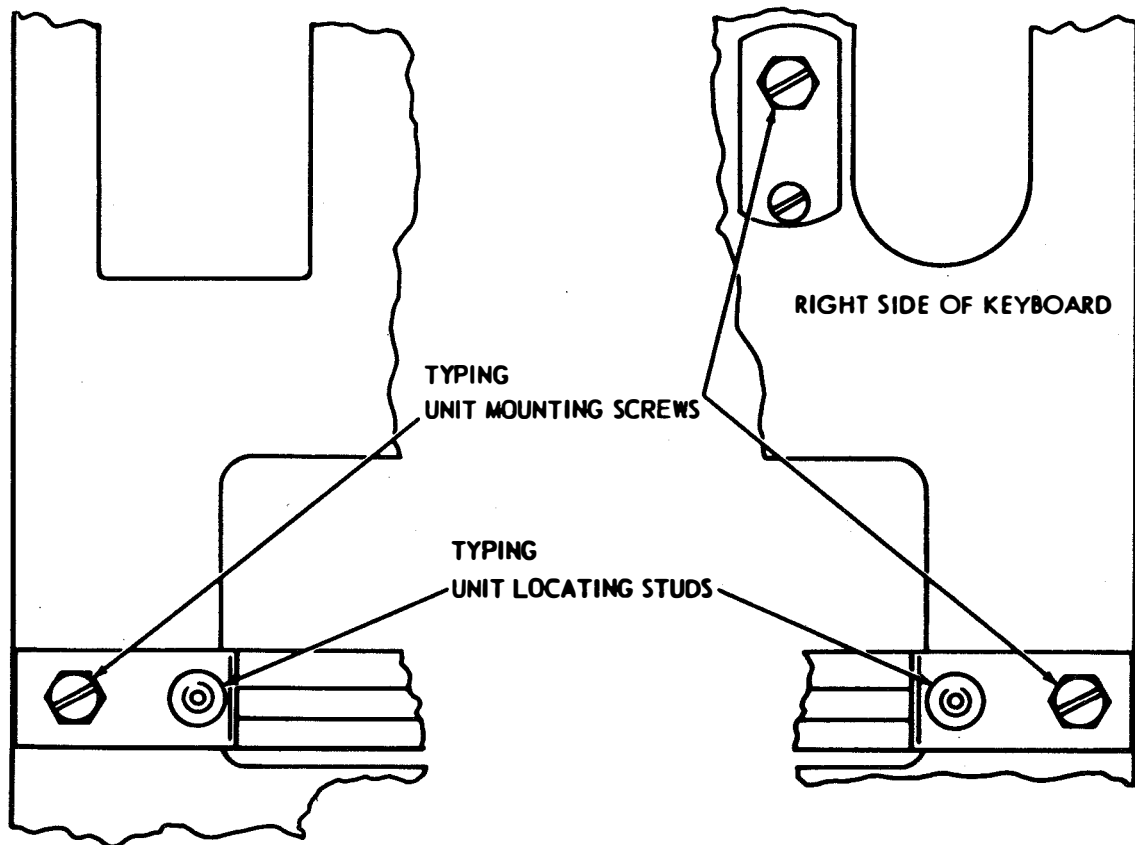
Mounting Typing Unit on Keyboard, Top View
